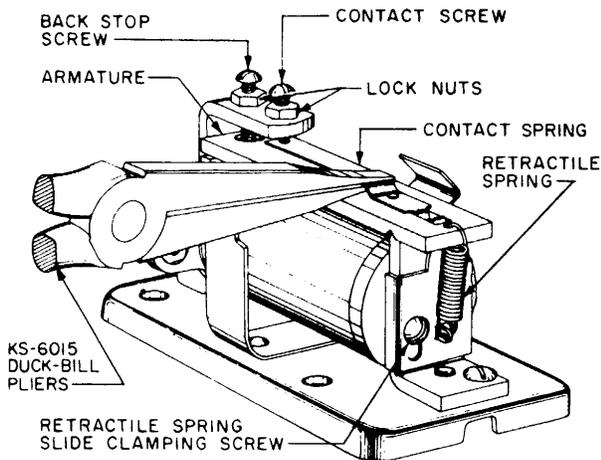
Method of Adjusting Contact Springs With Duckbill Pliers
